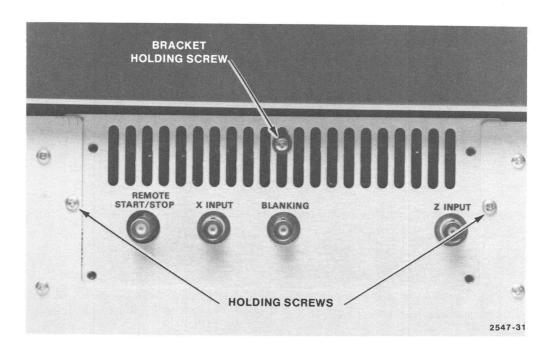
Screws Securing Video and Sweep Board Assembly.
